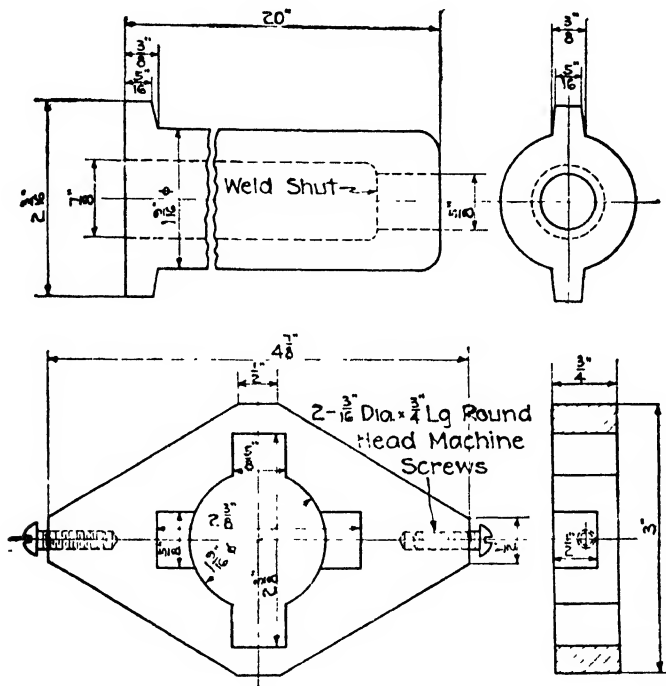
Protection tube and holder for thermocouple. This tube may be cast with a solid end or welded shut as indicated.
